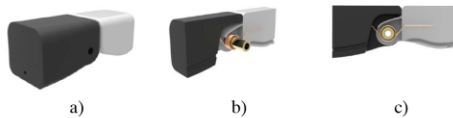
Final concept hinge joint design for the closing movement of fingers: a) External appearance; b) Brass tube and spring; c) Front view of the joint.
